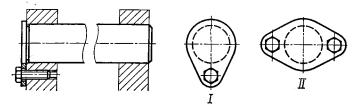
Pivot pin fixed against axial and angular displacement by fastening its flange with screws (I and II — flange variants)
